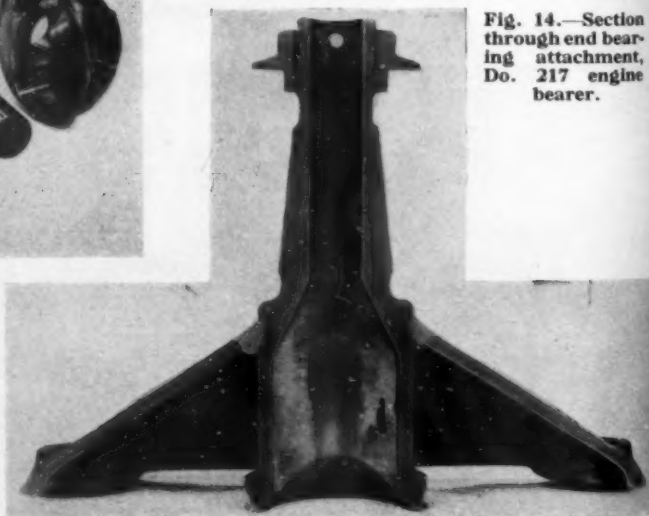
Section through end bearing attachment, Do. 217 engine bearer.
